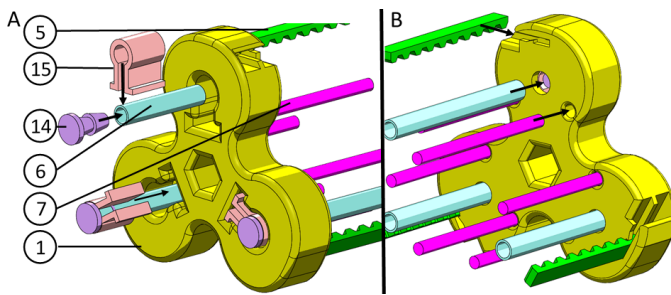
Exploded views of the inner-shaft end-effector disk. (A) An exploded front view of the inner-shaft end-effector disk (1). The air tubes (6) are closed off with plugs (14) that are secured with clamps (15) which squeeze in the slots. (B) An exploded back view of the inner-shaft end-effector disk. The six guidewires (7) are fixed inside the holes. The timing belts (5) tangentially slide in the slots that geometrically constrain their axial movement.
